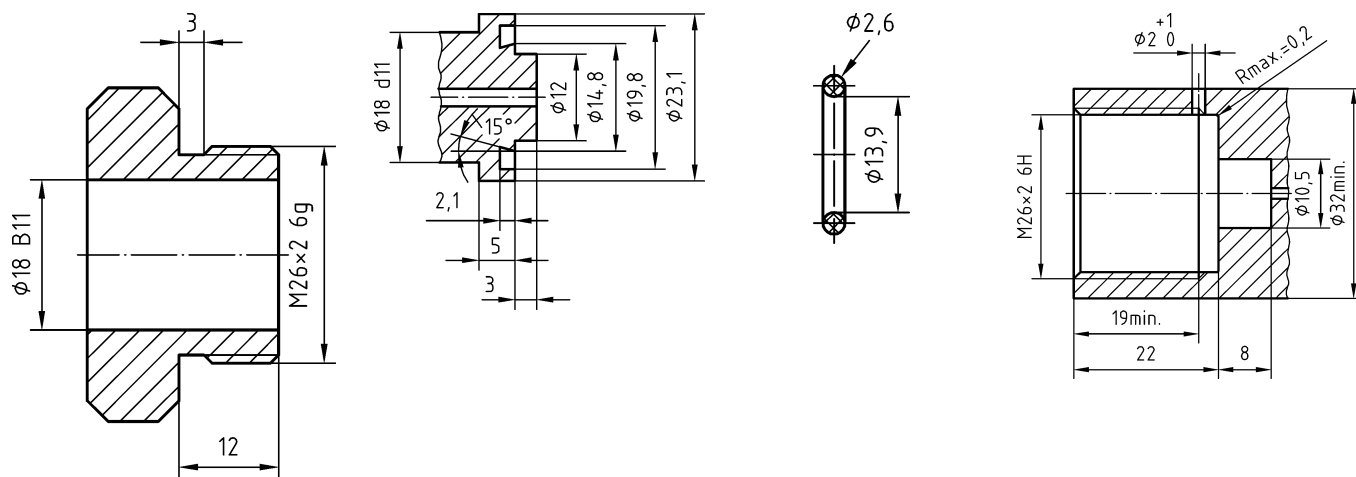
Handwheel Figure 1d) — Connector Figure 1e) — O-ring Figure 1f) — Valve outlet
